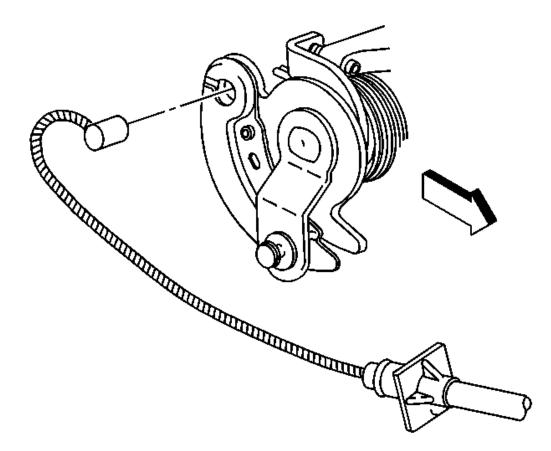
Identifying Accelerator Cable/Throttle Body Lever Courtesy of GENERAL MOTORS CORP.
